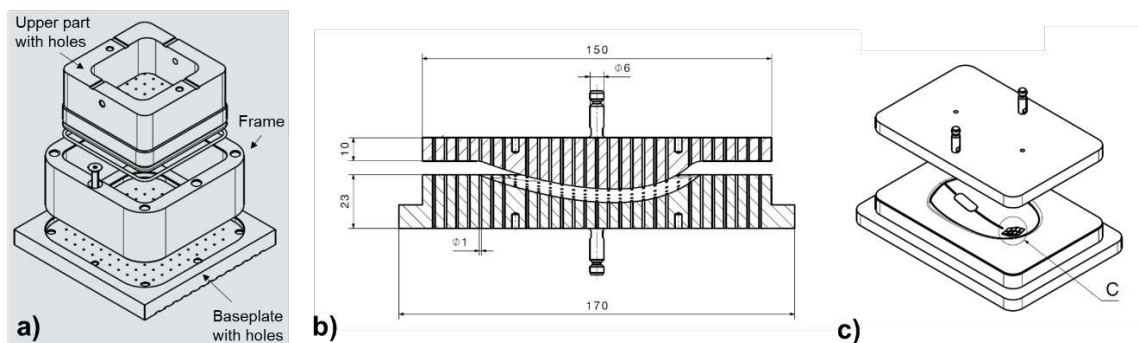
Mold used for the thermo-compression of BC boards (a), porous inserts (b) and solid body inserts (c) for 3D-moulding of mouse cover.
